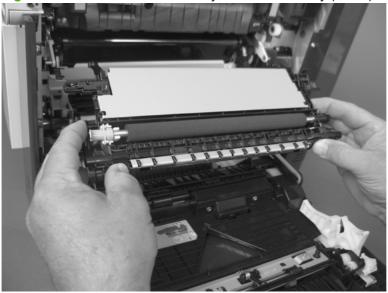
Remove the secondary transfer assembly (1 of 2)
